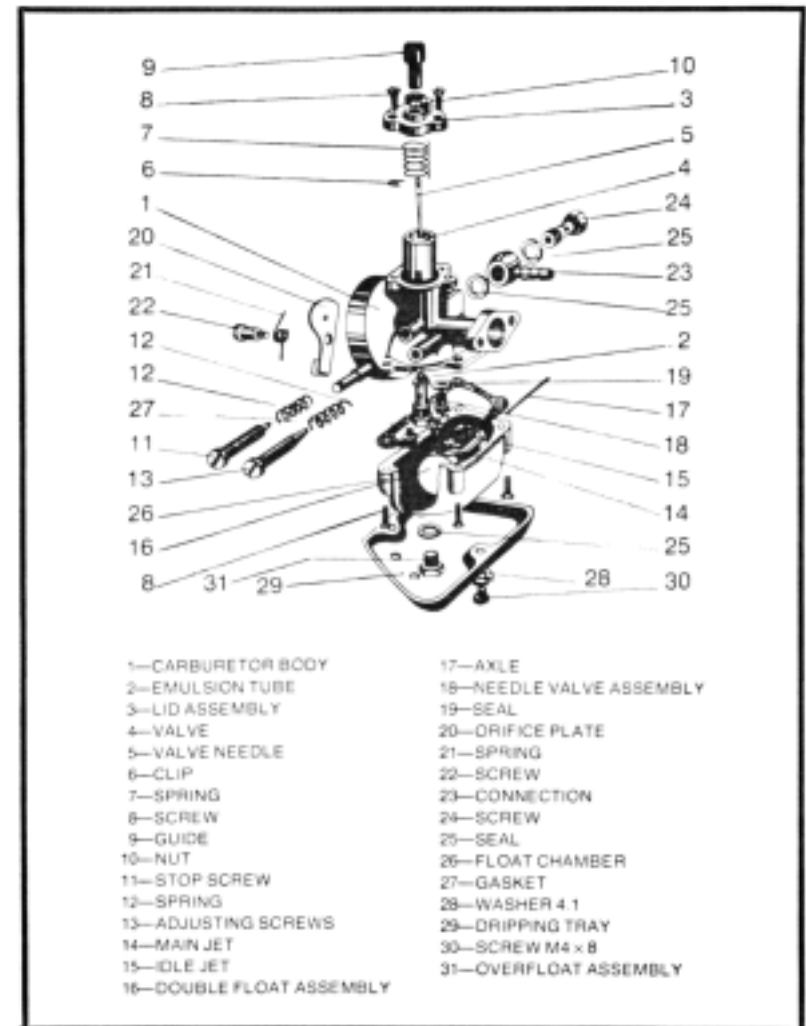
The Jikov carburetor, used on Jawa bikes.
